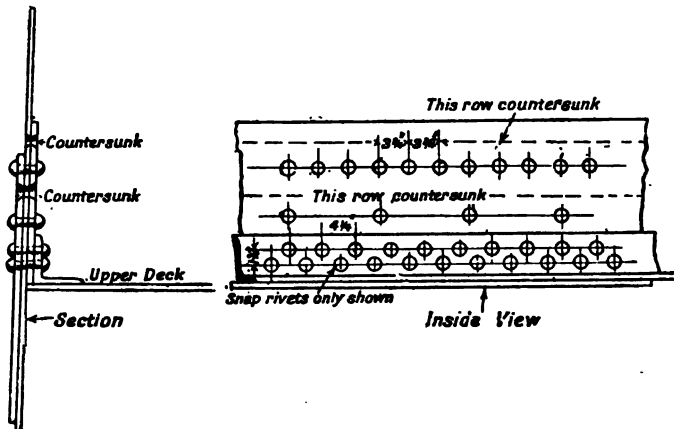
A.—Detail of Hydraulic Riveting in Upper Deck Sheer Strake.
